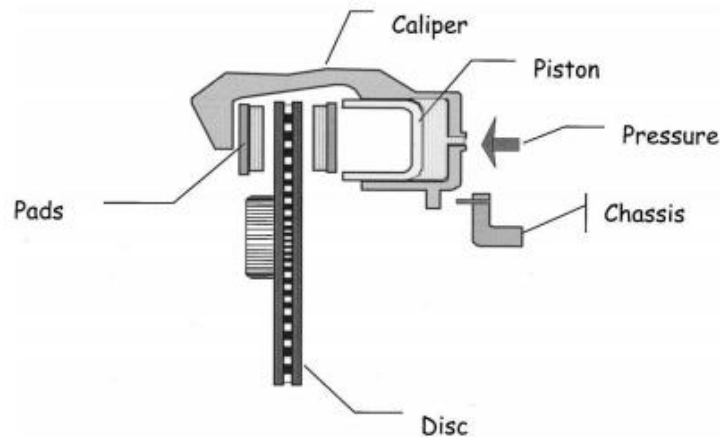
Disc and pad brake assembly with a single-piston and a ventilated disc (D Chan and G W Stachowiak , 1996)
